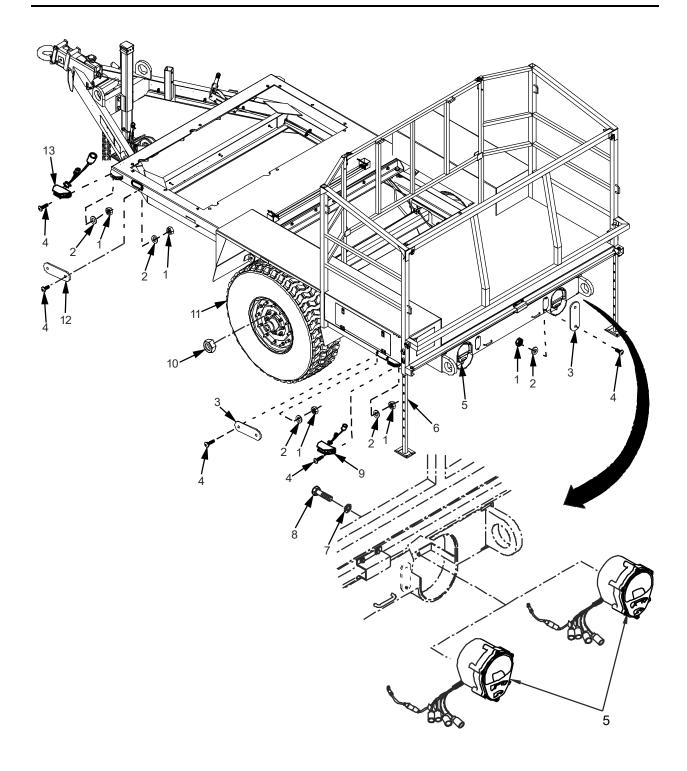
Chassis Frame Assembly, T211125G Green, T211125T Tan (Sheet 1 of 5)
